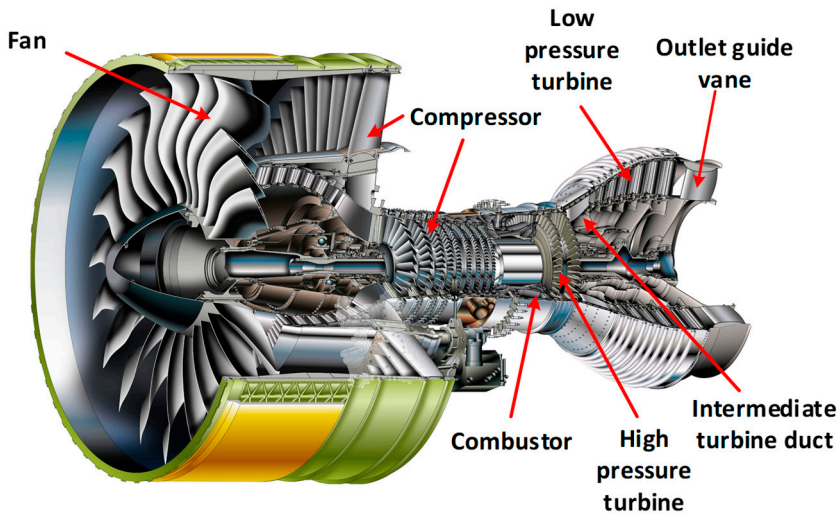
Cut view of a gas turbine, GP7200 aero engine [3].
